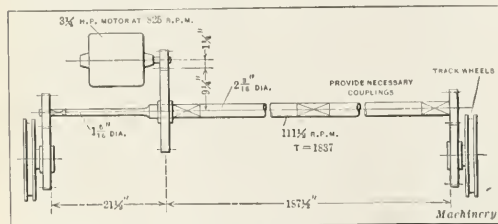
Preferable Layout for Shafting of the Same Installation as Fig. 1
